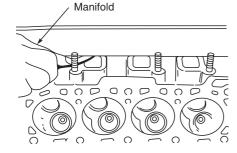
Measuring Surface of Intake Manifold Seating Face
